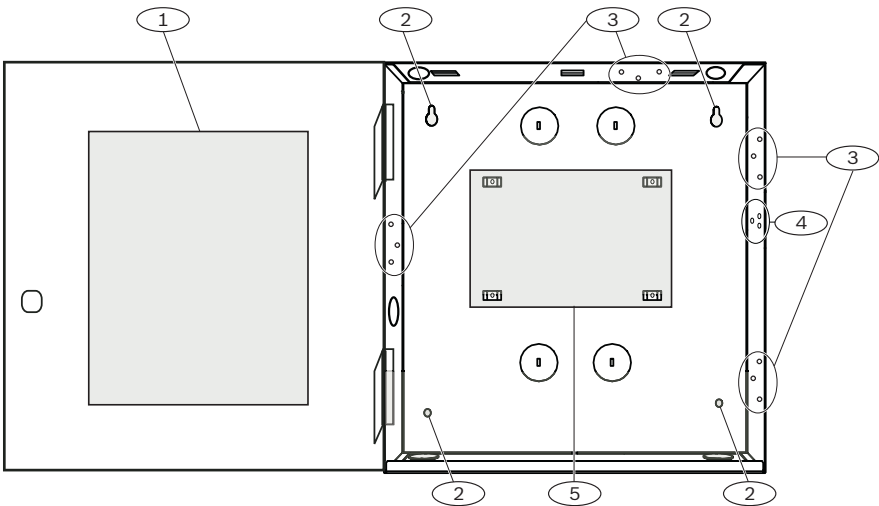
Enclosure and control panel mounting (B10 shown)
